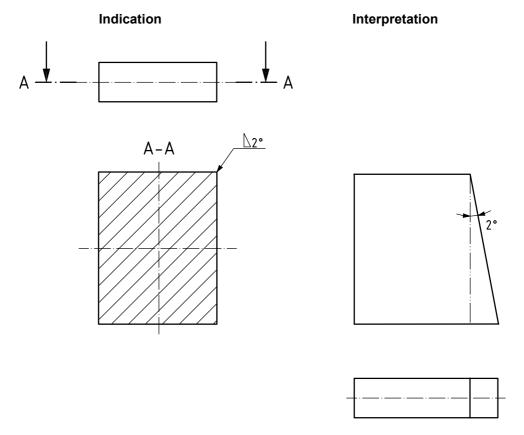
Draft angle indication on a feature represented on a cross section of a part
